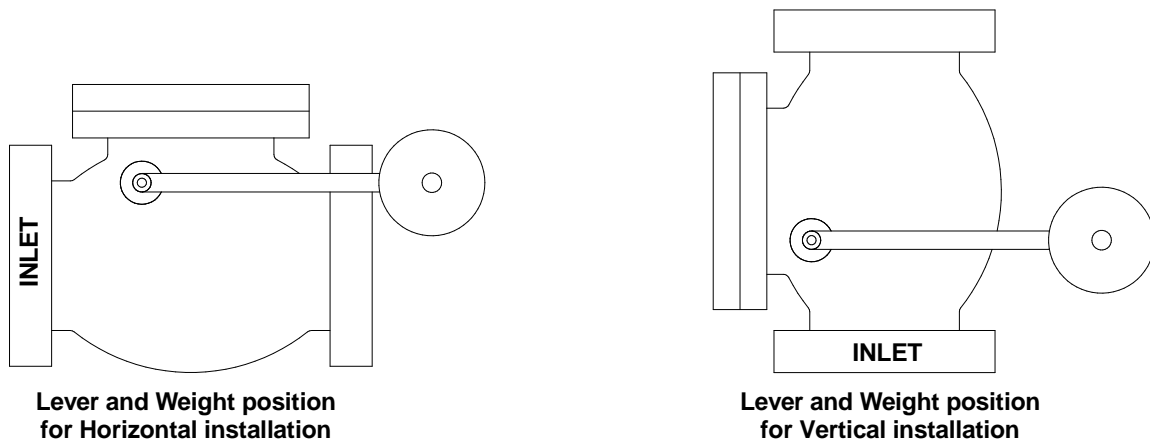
APOLLO® IRON SWING CHECK VALVE WITH LEVER AND WEIGHT
